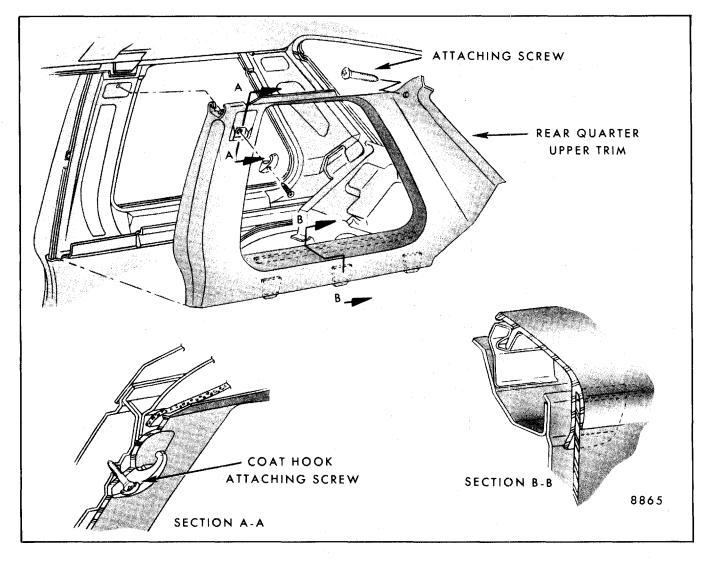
Quarter Upper Trim Attachment - H-27 Style
